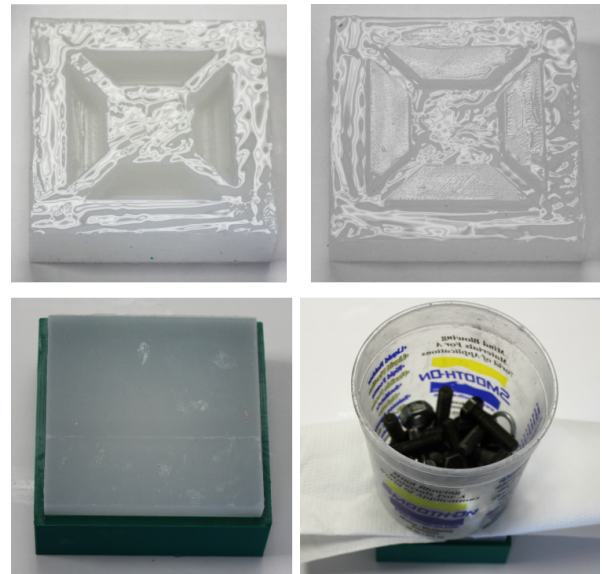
Top: The two casted pieces covered in glue. Bottom left: The joint pieces inside of the mold-wall, which helps in the alignment and prevents oozing of the glue. Bottom right: A weight is placed on top of the joint pieces.
